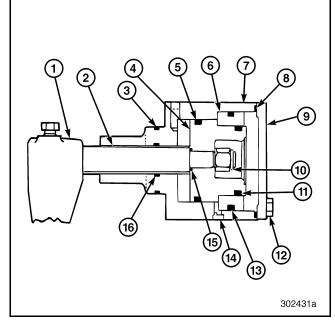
Cutaway View of Three-Position Range Shift Cylinder
